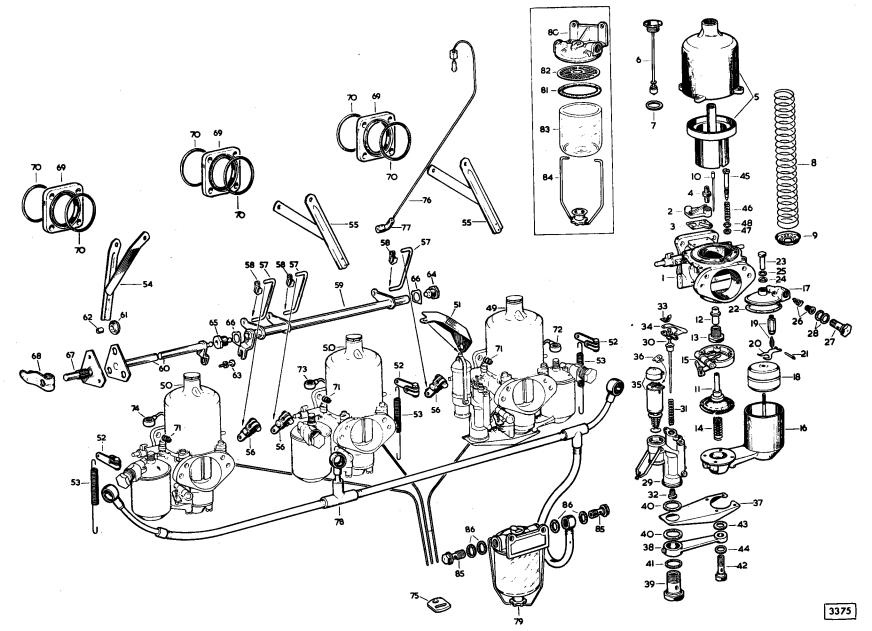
Exploded view of carburetter, fuel connections and control linkage.
